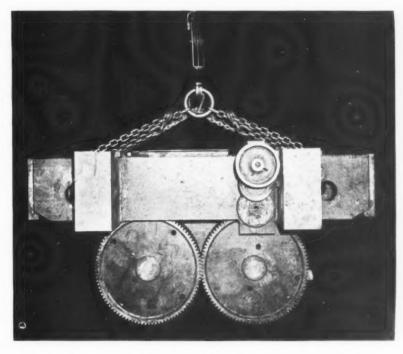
Arc-welded Drive Assembly of Press, with Welded Gears
